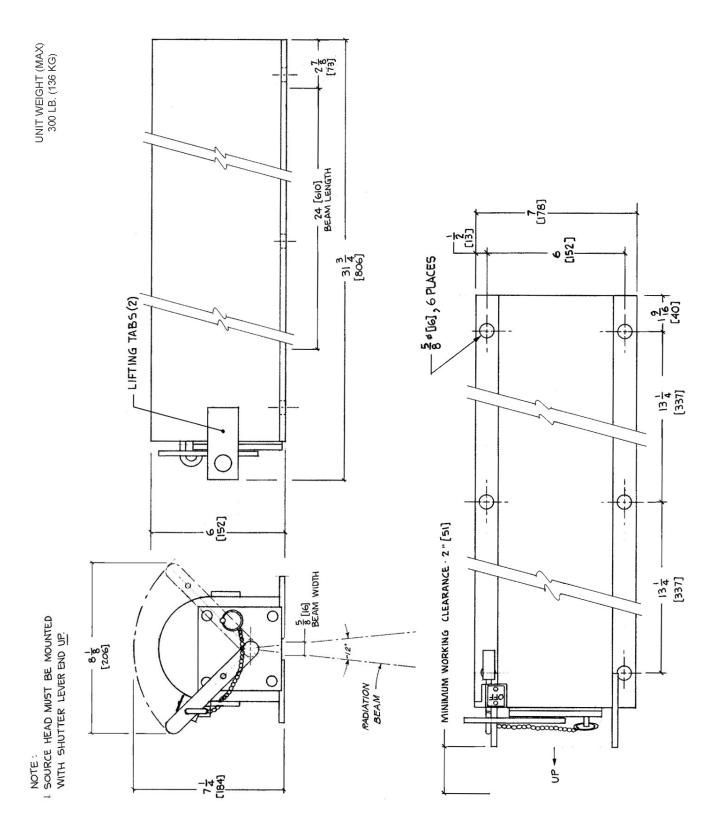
860473: Mounting dimensions - Model 5195 strip source, 2 ft, 1000 mCi (sheet 1 of 1)
